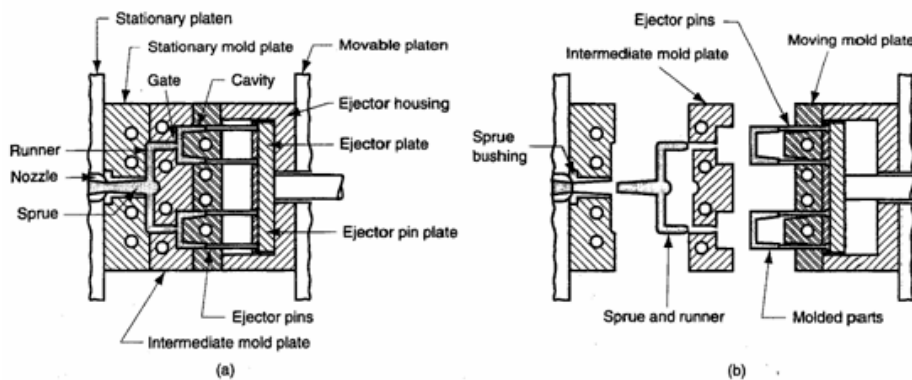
Three-plate mold. (a) Closed & .(b) Opened.[2]
